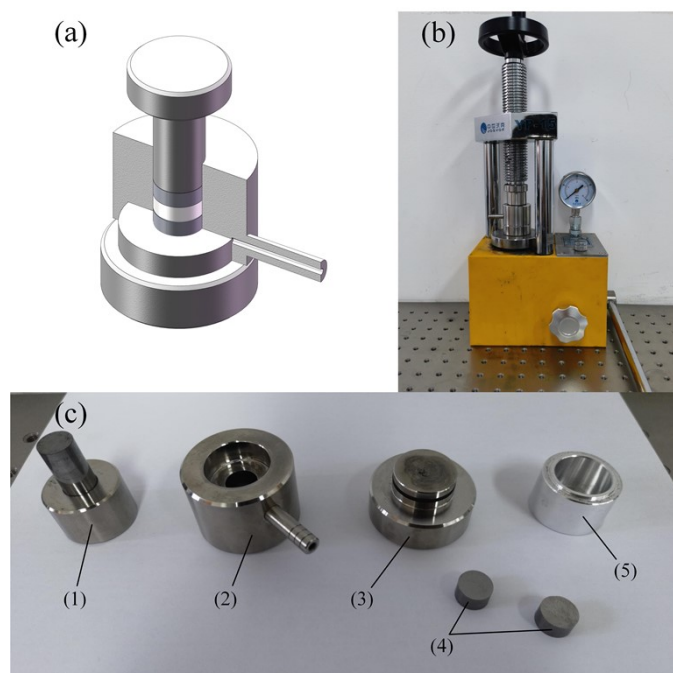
Diagram of the pressing process: (a) assembled die containing items to be pressed, (b) tablet press, (c) The various parts of the die. (1) upper punch, (2) die set, (3) die bottom, (4) lower punch, (5) demolding pad.
